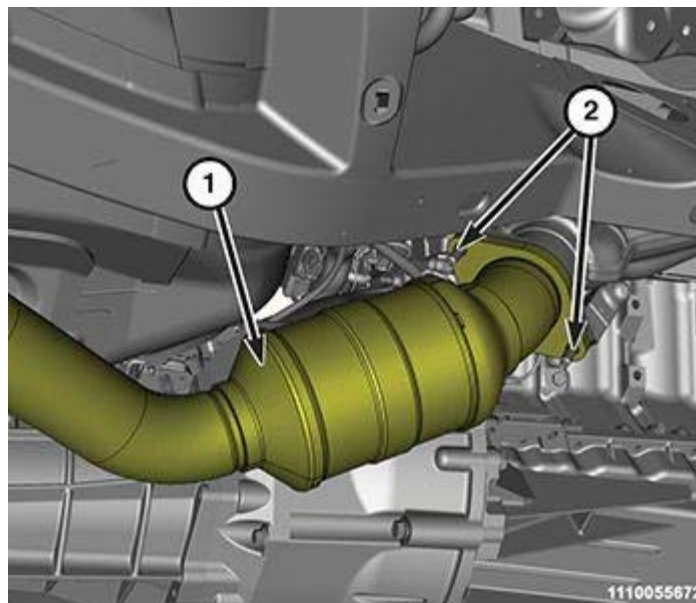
Catalytic Converter & Manifold Flange Nuts
